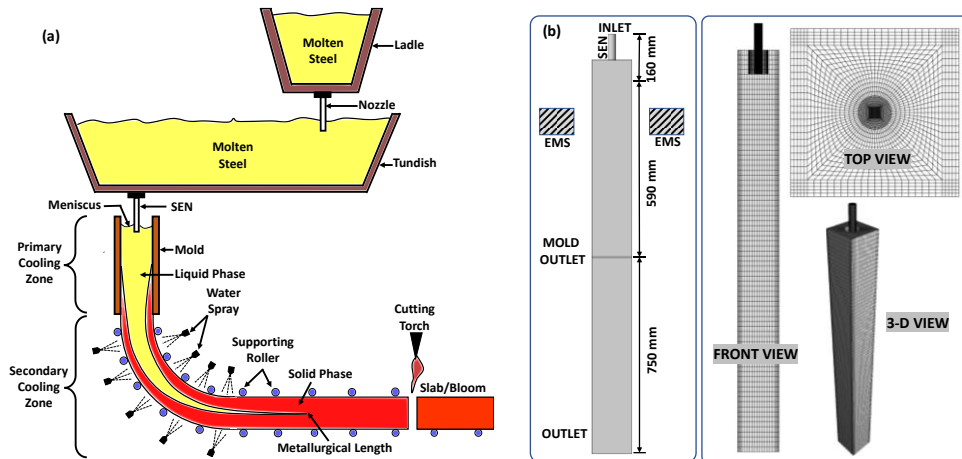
Schematic of (a) the continuous casting process and (b) geometry used for EM field generation and mold grid details
